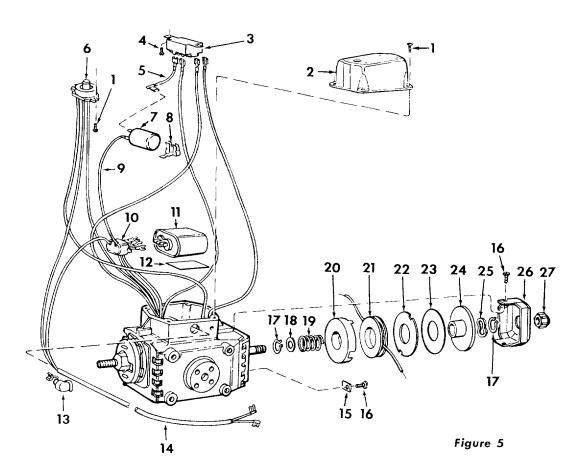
PARTS LIST-63472 MOTOR ASSEMBLY
